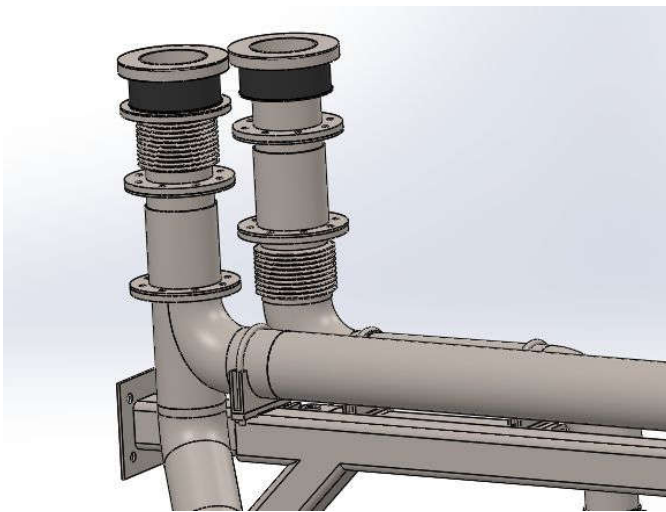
without flanges, 2 with one flange and 3 with two flanges (Designed in SolidWorks by bachelor group).
